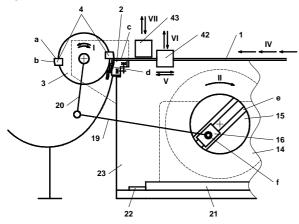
The cinematic diagram of a sheet metal expanding machine with oscillatory main motion (side "view"; detail)
